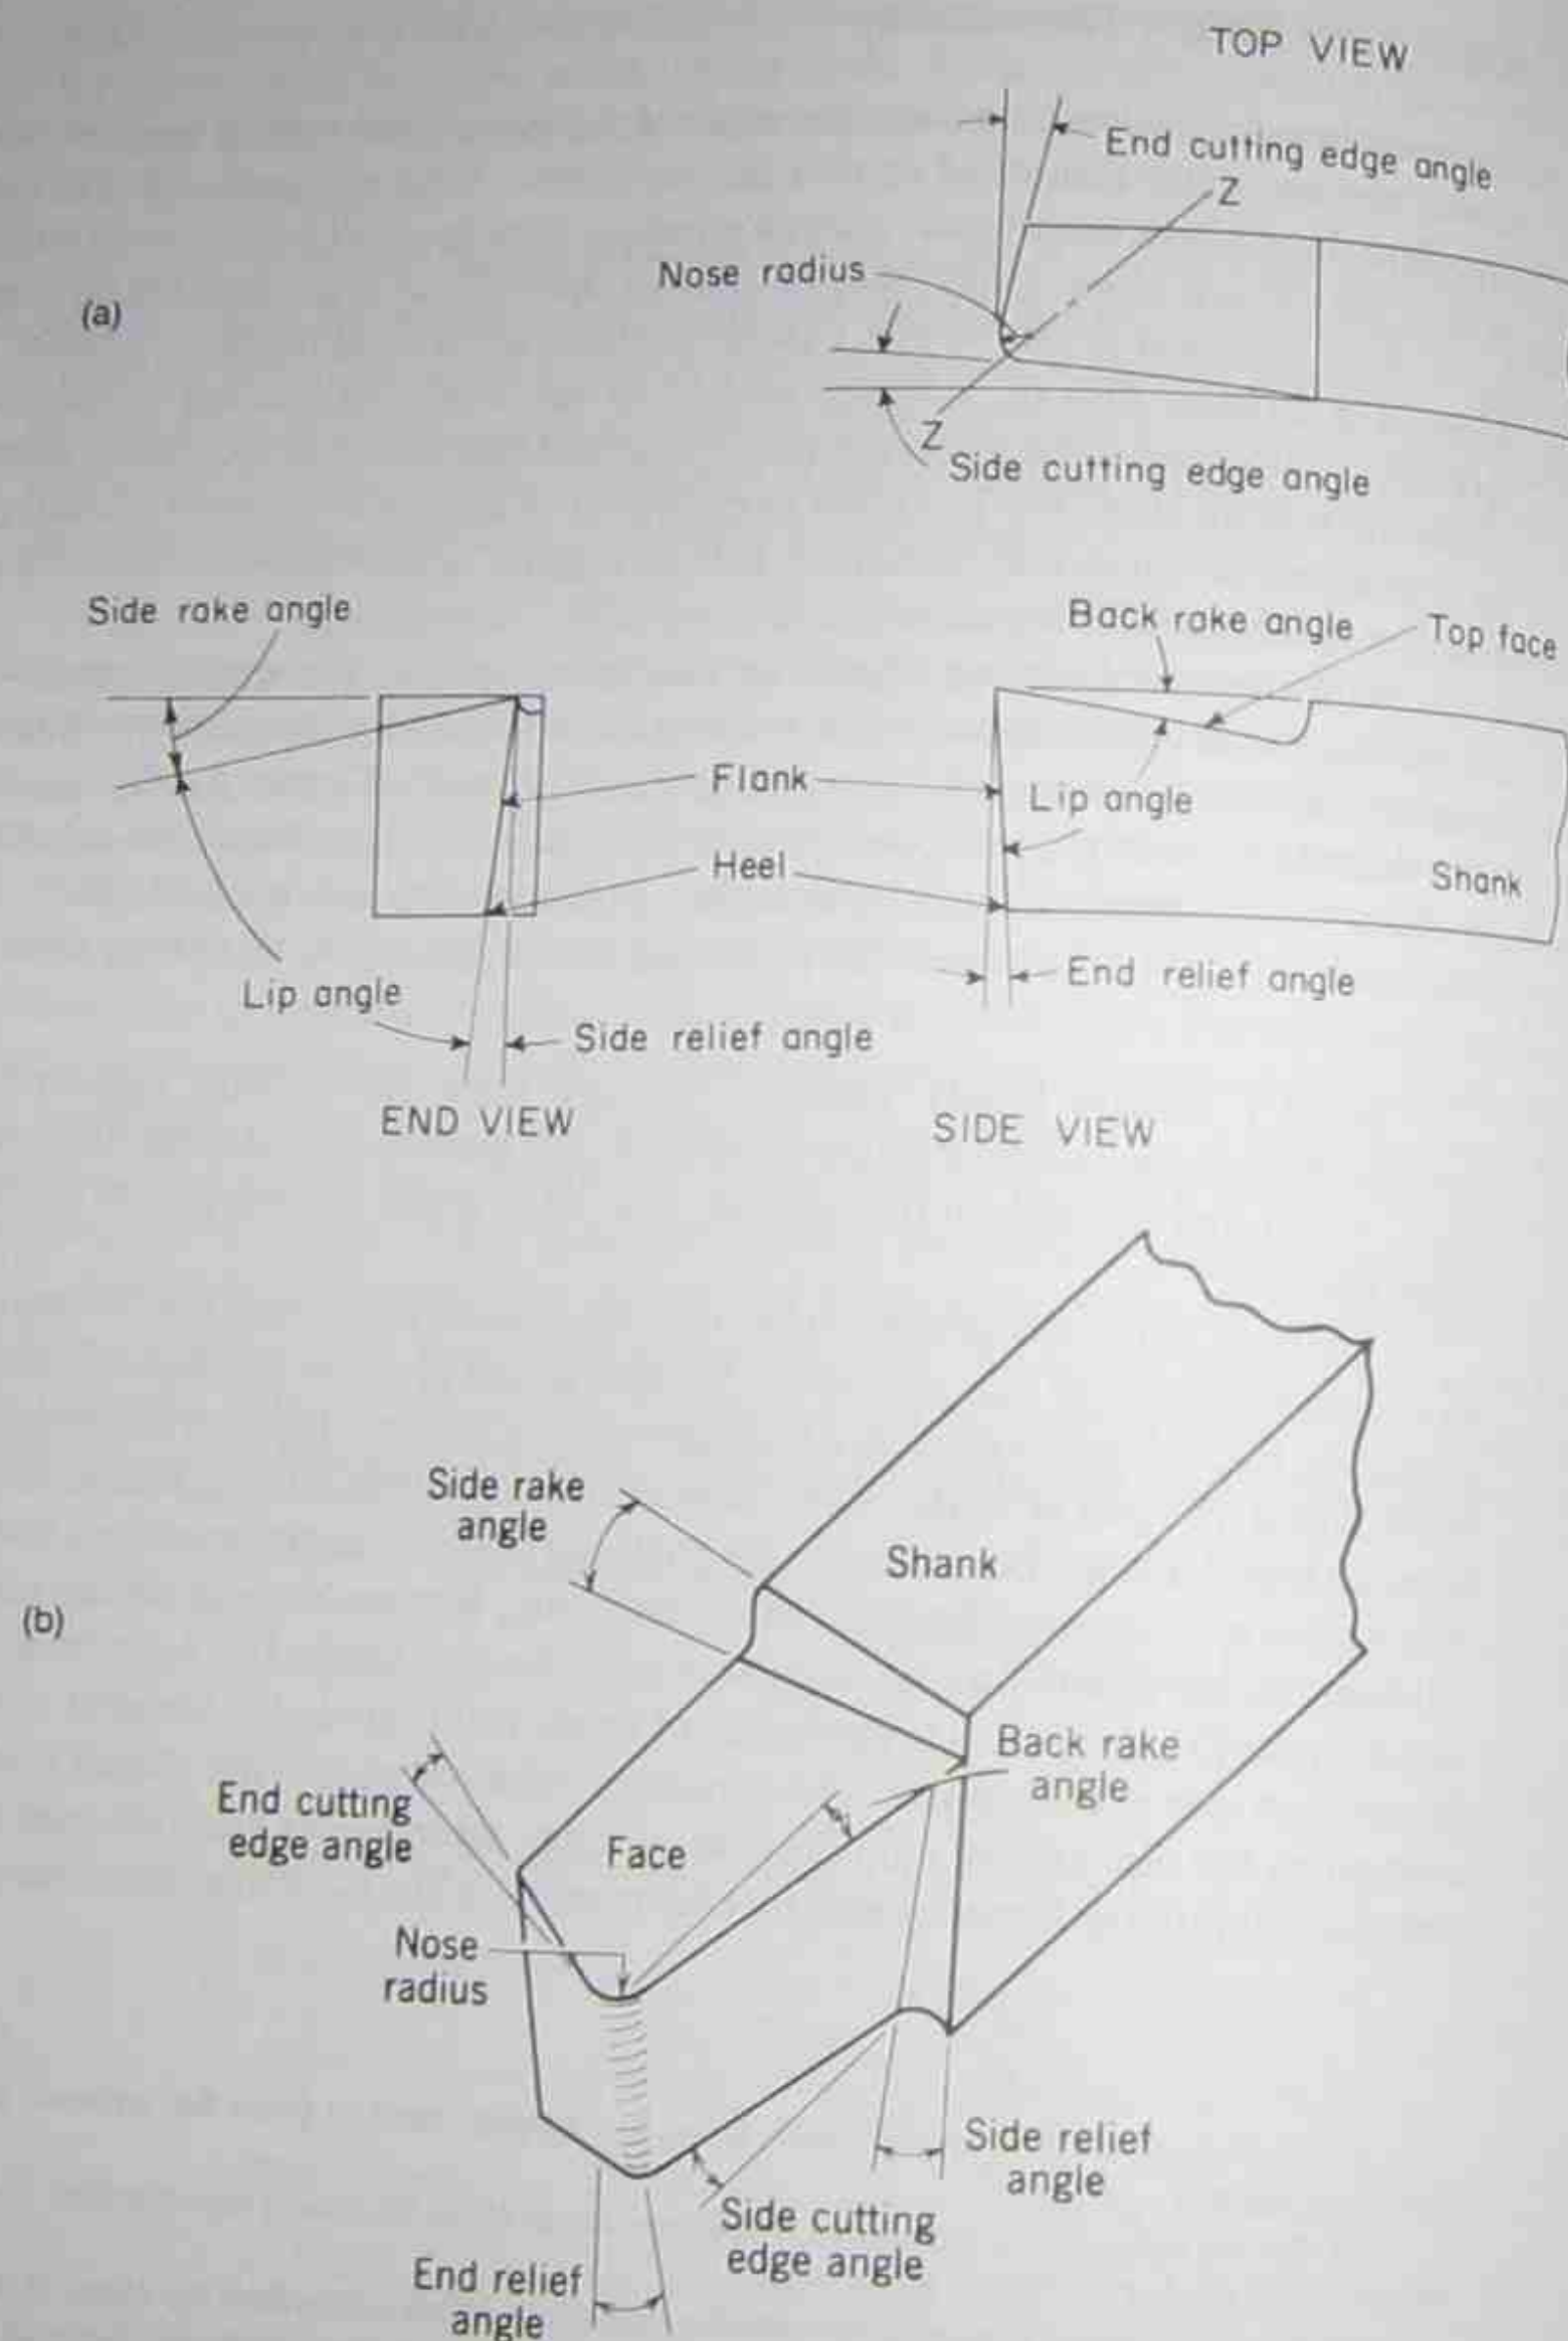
(a) Three views of a single-point cutting tool showing the tool signature and (b) overall view of a finish-ground tool.
